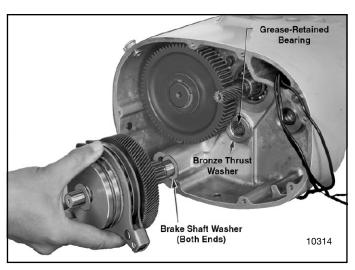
Removing Load Brake and Clutch Assembly (1/4 & 1/2 Ton Hoists)
